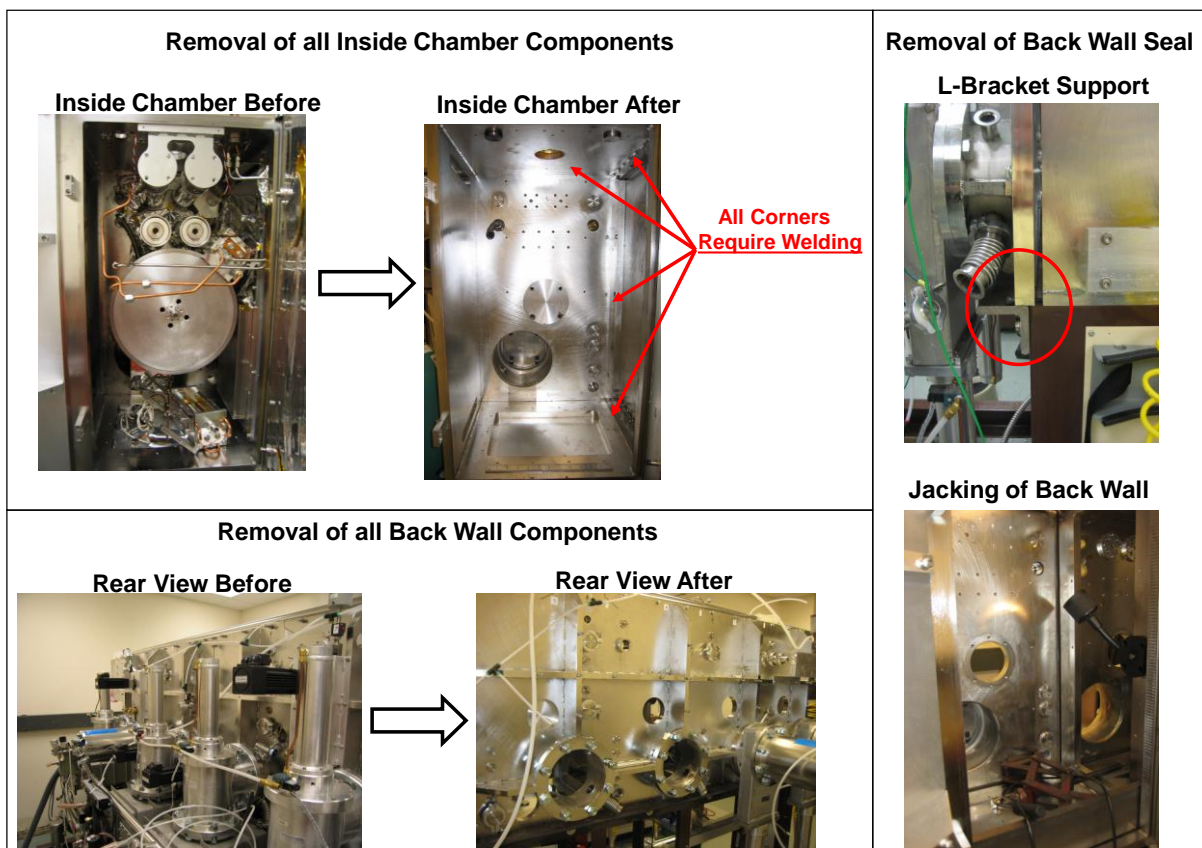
Removal and welding of the web coater chamber backing plate to create an individual custom chamber
